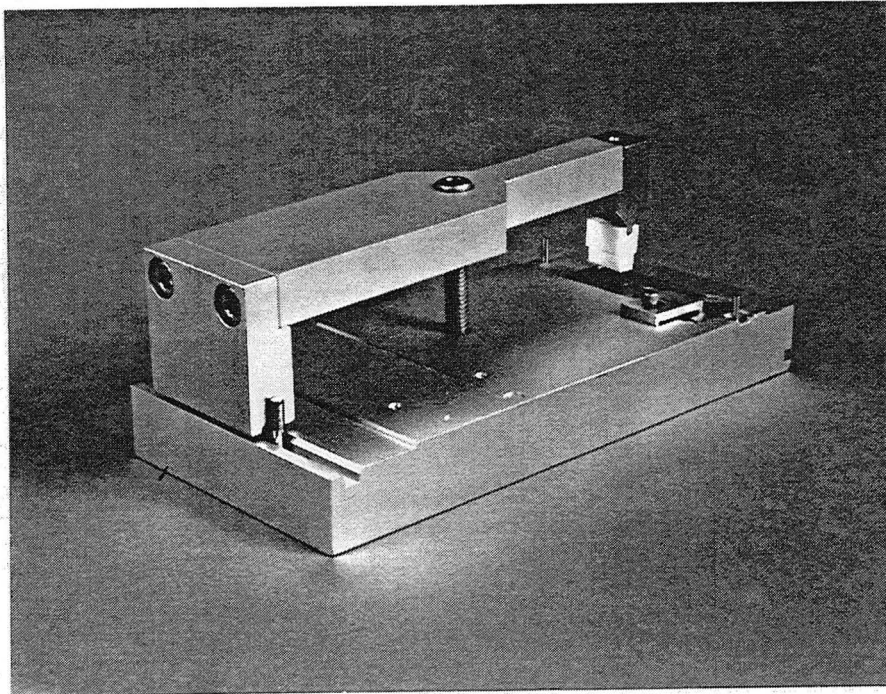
The specially designed fixture for assembling the LBL-WC. A normal force is applied to the LBL-WC by tightening the screw in the center of the fixture. The Teflon piece is flexible enough so that the pressure does not crack the silicon wafers and while in place, the edges of the LBL-WC can be glued without contaminating the front surface.
